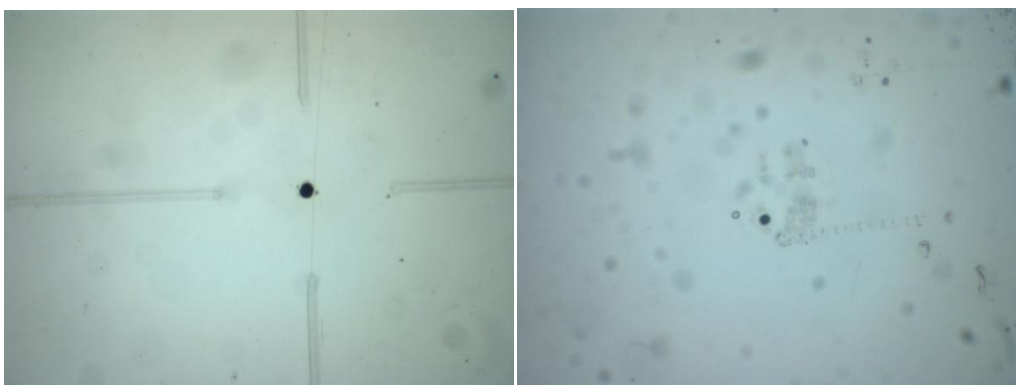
Single hole and alignment marks drilled in 50 μ m thick polystyrene, left laser entrance side (9 μ m) and right, laser exit side (4 μ m)
